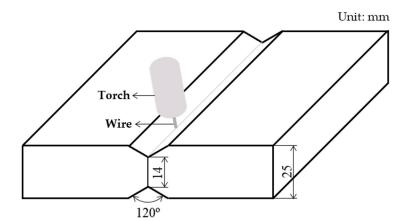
Schematic design of double-sided butt V-groove joint specimen.
